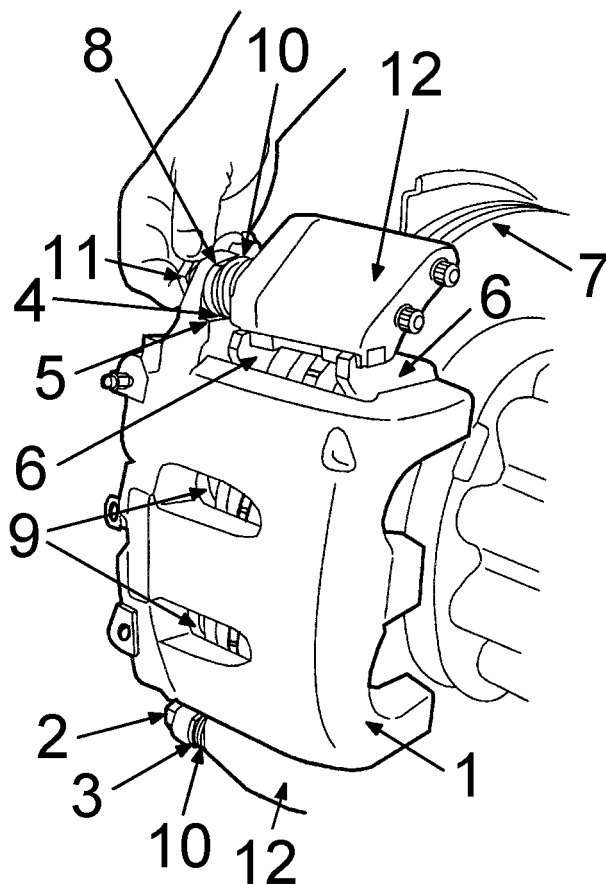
Rotate Caliper Closed about Lower Hex Flanged Mounting Bolt and Install Upper Hex Flanged Mounting Bolt
